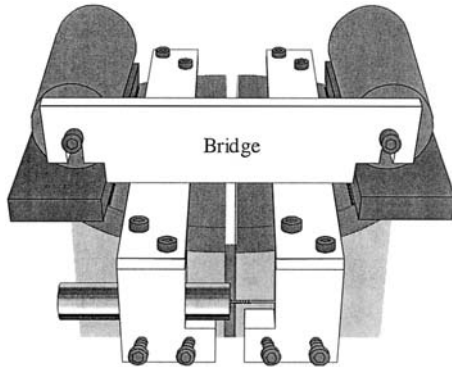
Schematic of the top of an RDB specimen when ready for compression loading.
